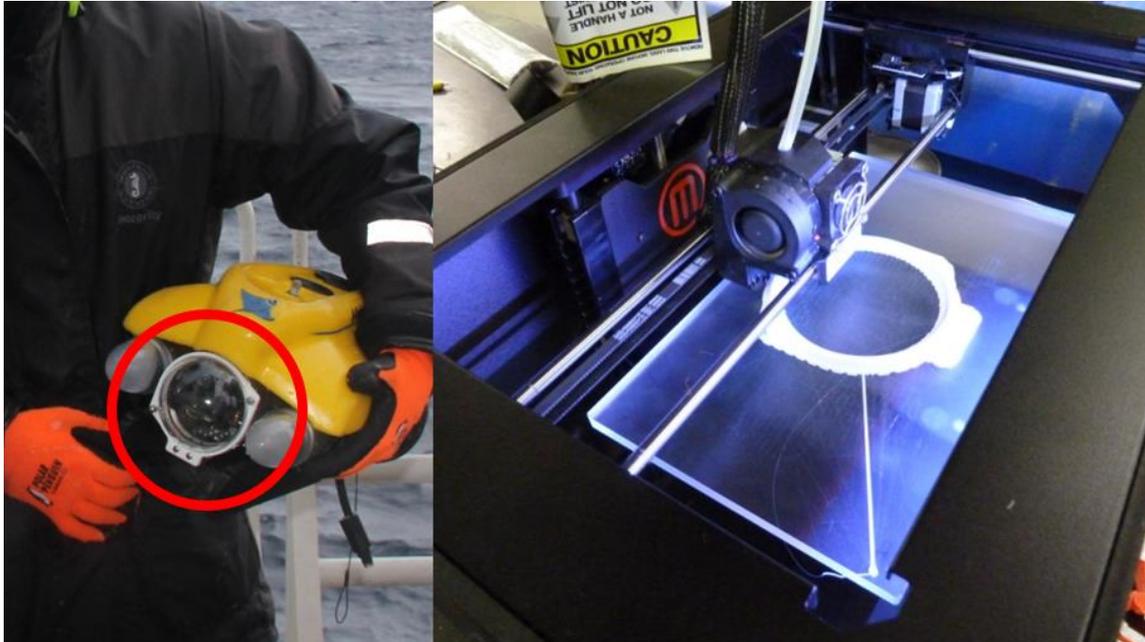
Replacement ROV part printed aboard HEALY (RDC Photo).
